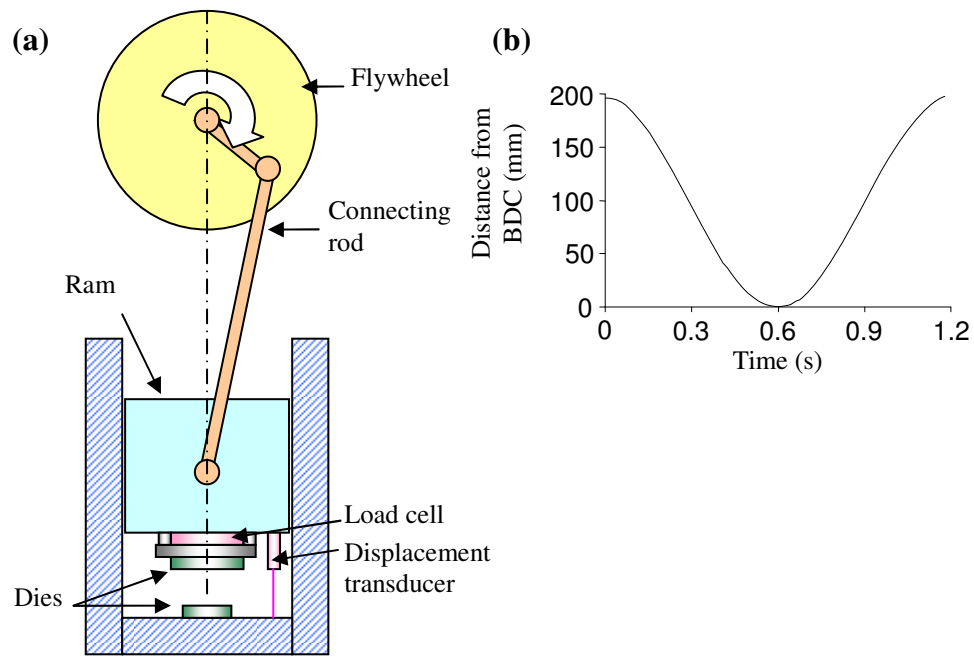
(a) Direct crank drive mechanical press (adapted from Lange, 1976); (b) displacement-time profile of the slide.
